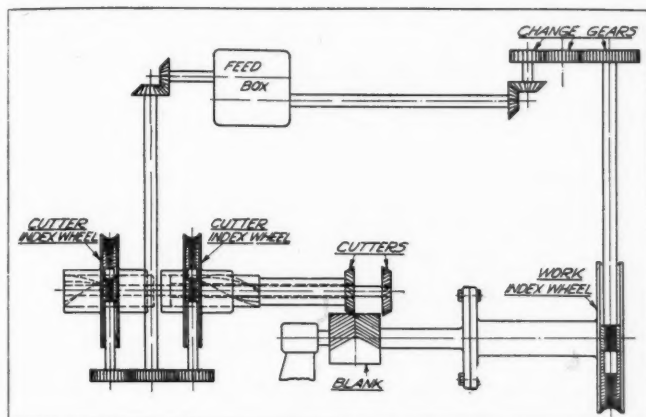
Diagram of Sykes gear generator indexing mechanism
